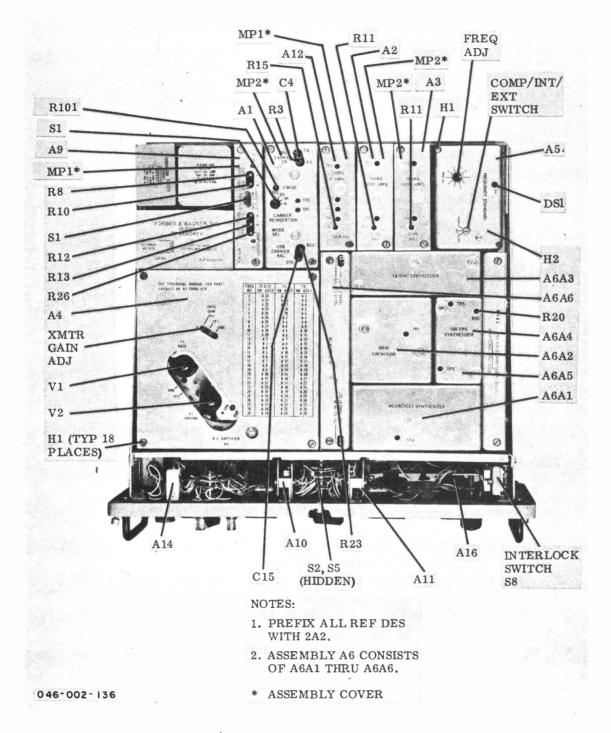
T-827B/URT Chassis, Top View, Component Location
